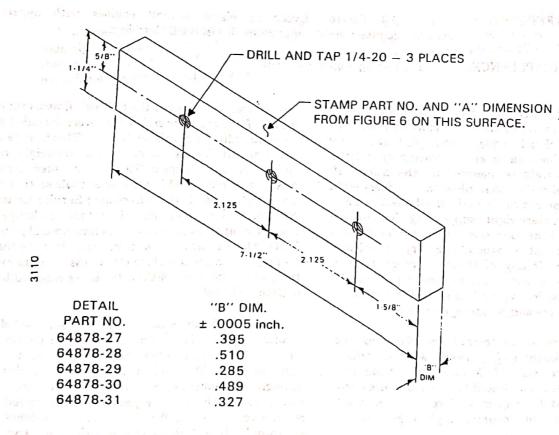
Dimensions of New Spacers for P/N 64878 Fixture
